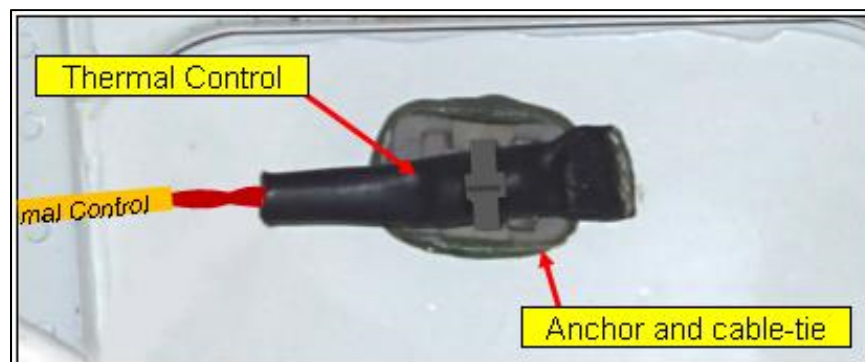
Example of thermal control located on structure with cable anchor TU02782, refer to Click Bond Kit Instruction TN02782.
